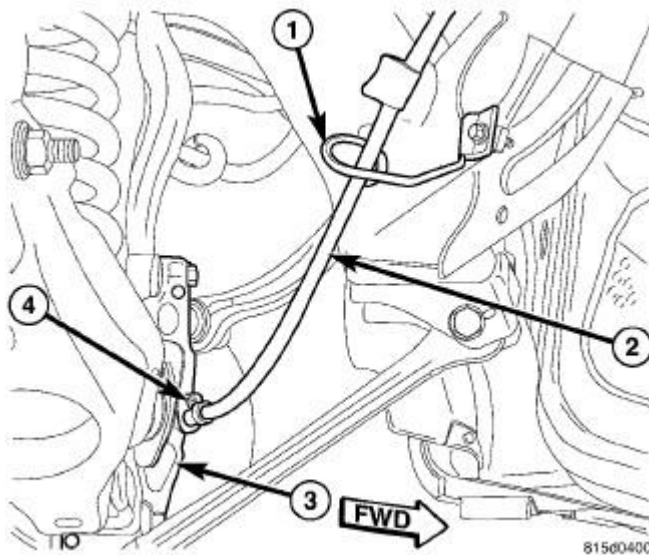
REAR CABLE ROUTING TO KNUCKLE
